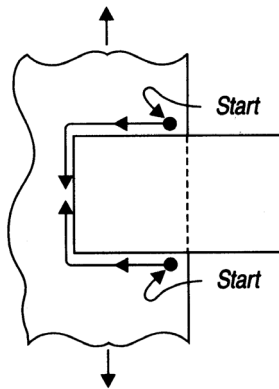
Suggested direction of welding travel to avoid notches.
